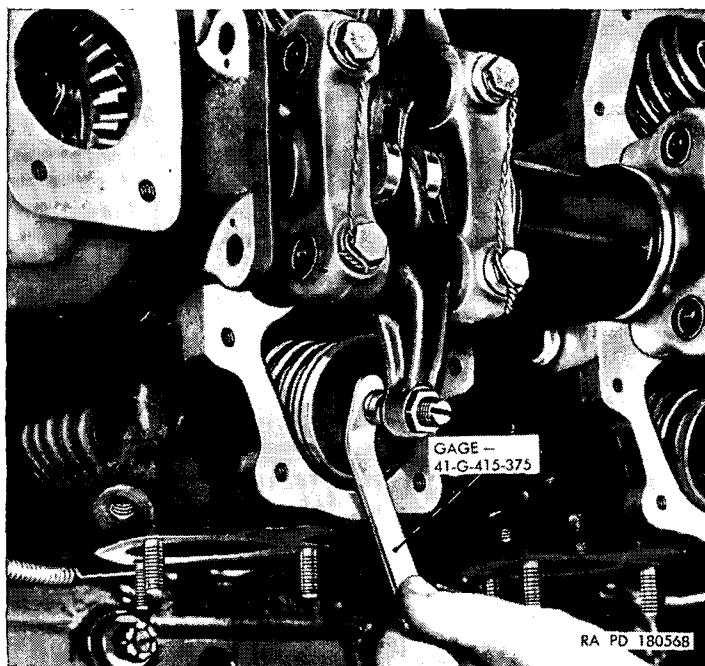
Adjusting intake valve rocker clearance to 0.100 inch for engine timing.
